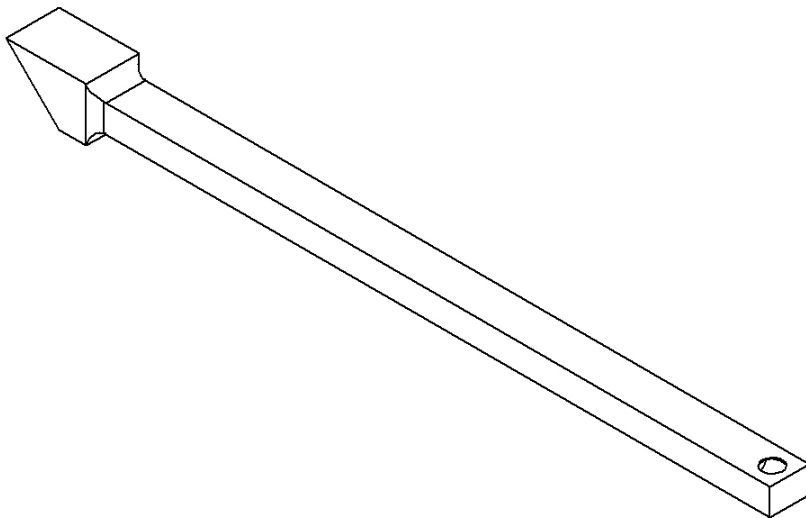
Cantilever drawing, isometric view. Dimensions in micrometres [μm].
